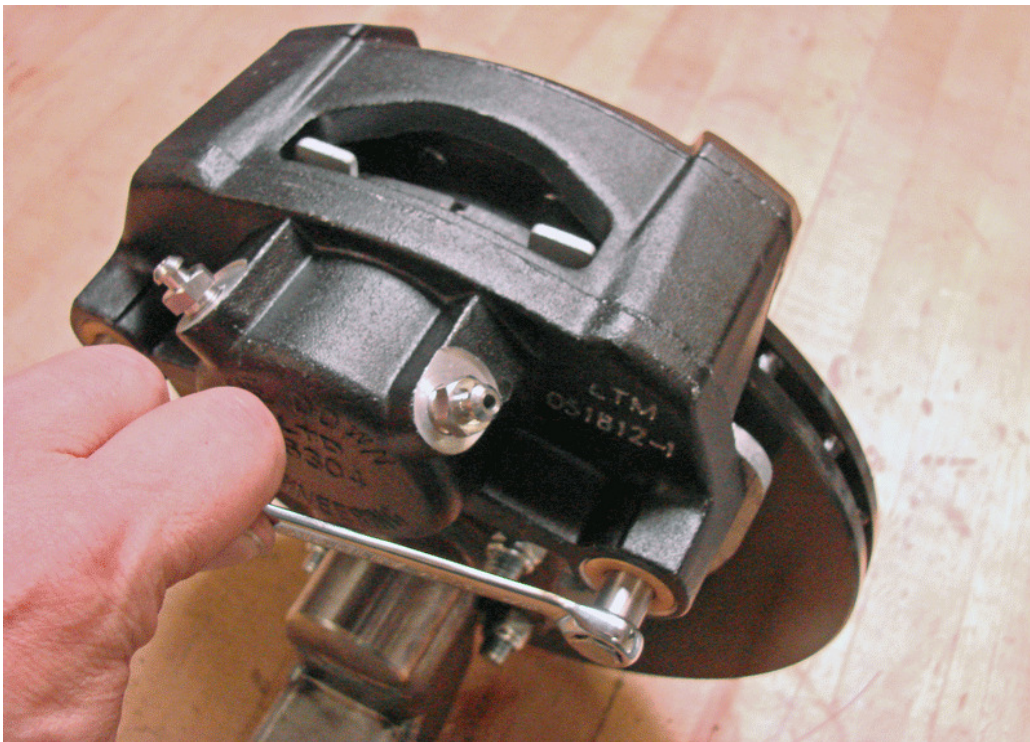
Using a 7/16" Socket/Ratchet Drive or Box End Wrench Loosen the First Slider Pin. You May Start With Either the Left or Right Slider Pin.
